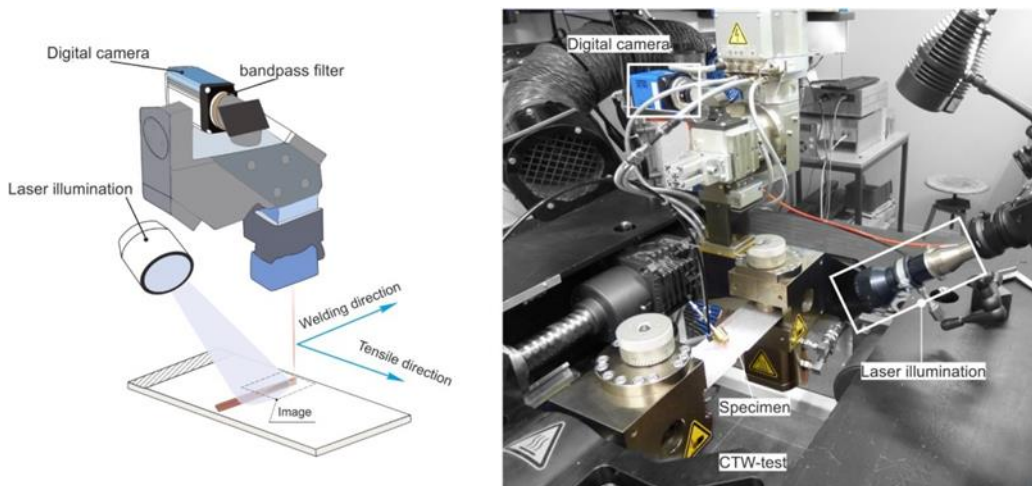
CTW test facility used in conjunction with laser welding
